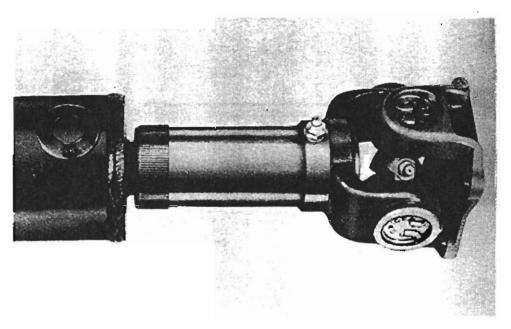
The "Spicer" Universal Joint Consists of a Journal Cross and Four Round Type Bearing Retainers.
